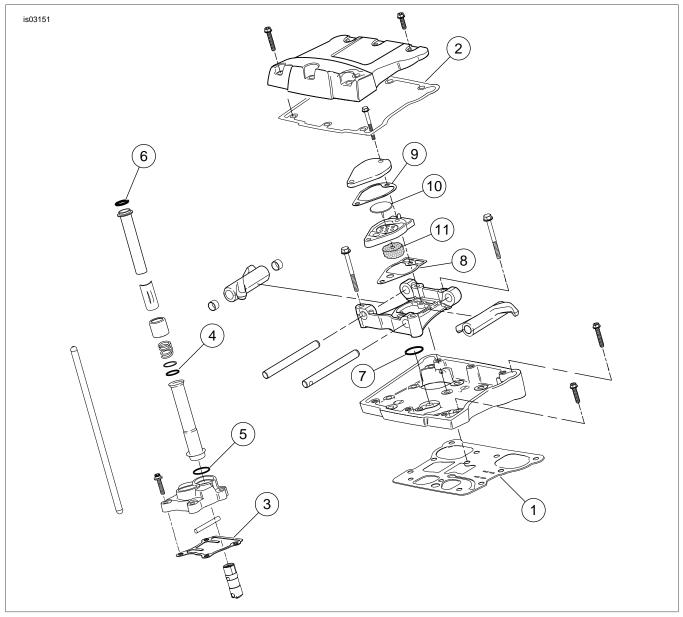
Service Parts: Screamin' Eagle Twin Cam 103 (1690 CC) Conversion Kit
